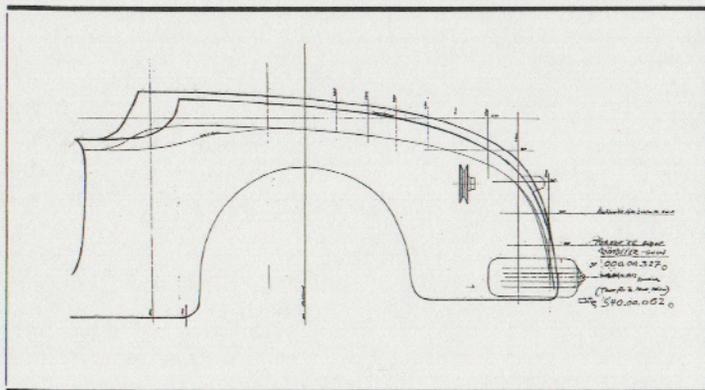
(July 1952) shows an America variation with fixed windshield and lowered rear wheel wells. Steel-bodied roadster photographed at Heuer in 1952 was perhaps the only car built to this design.
